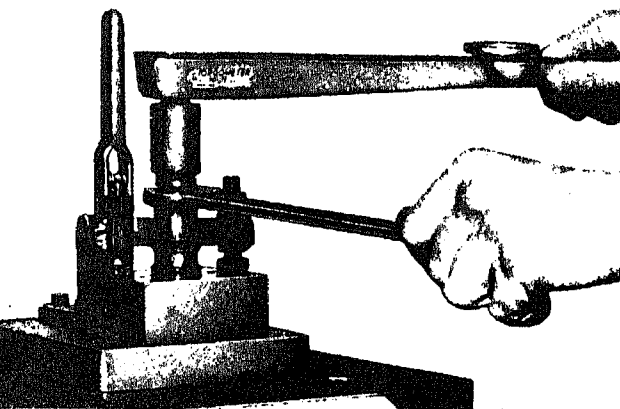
Cylindrical injector in ST-569 holding fixture
